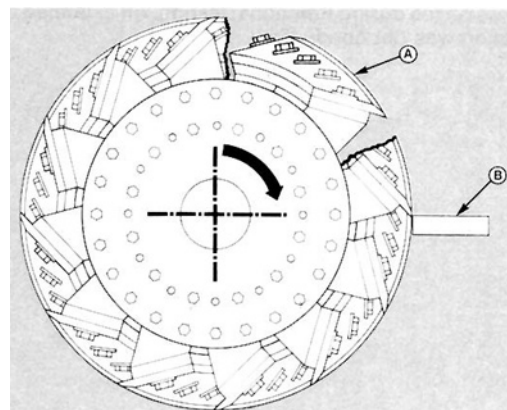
Cutterhead Assembly: (A) Knife, (B) Shear Plate.
